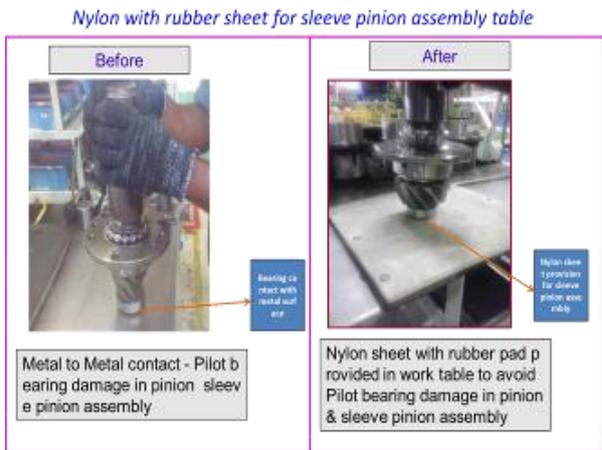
Nylon with rubber sheet for sleeve pinion assembly
